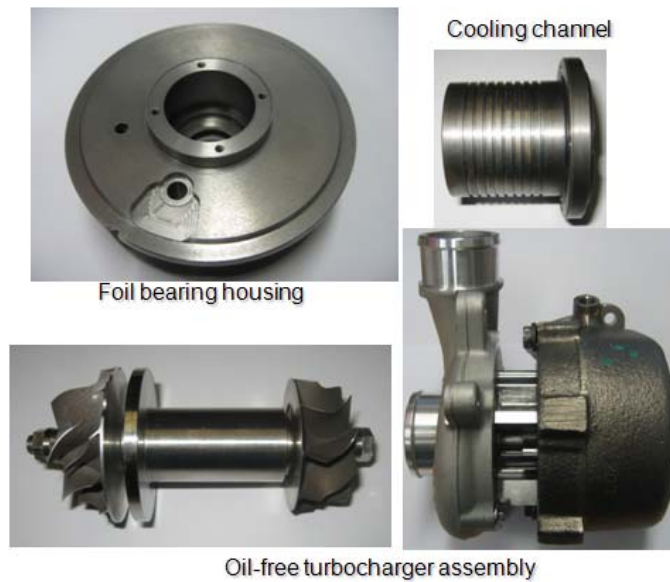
Manufactured oil-free TC with the assembly of rotor and housing.
